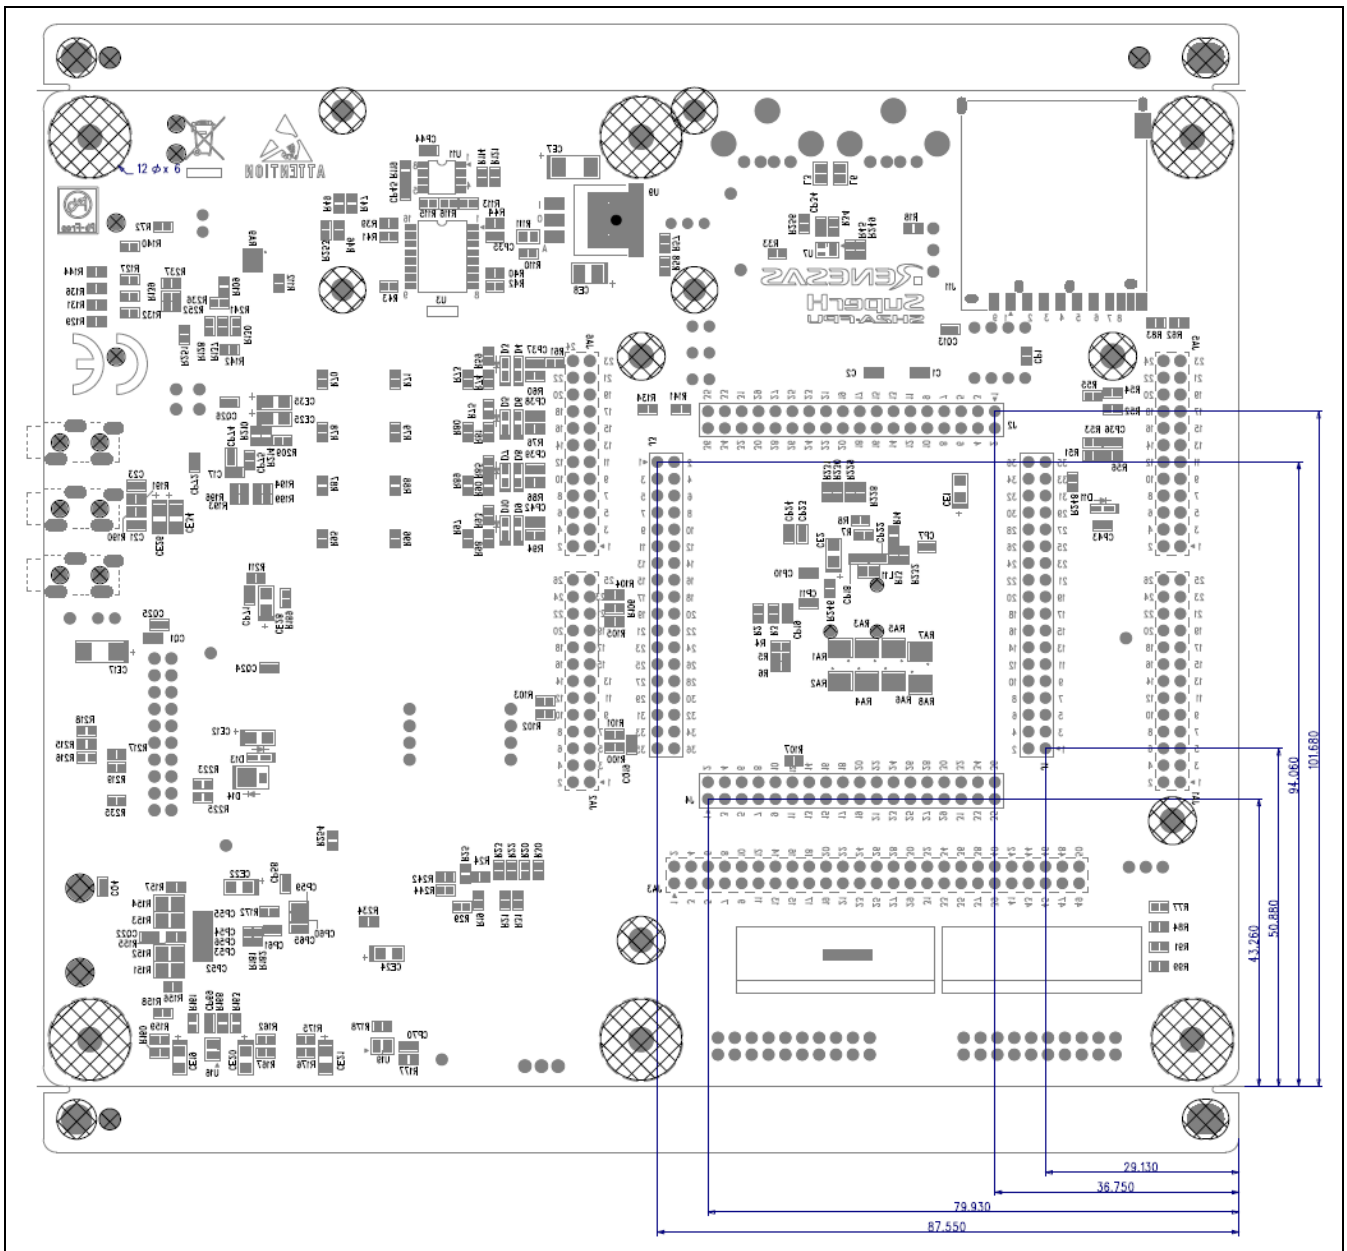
R0K5726B0C000BR Dimensions 3 (Perspective view of the component side)
